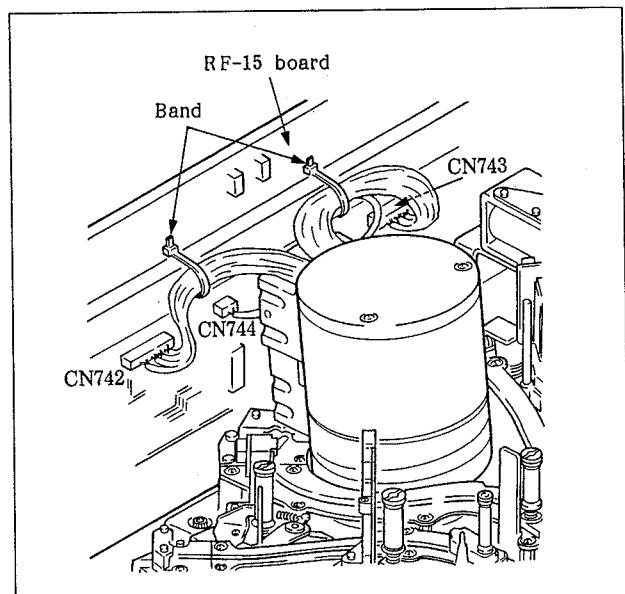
Removing the Band and Disconnecting the Connectors
